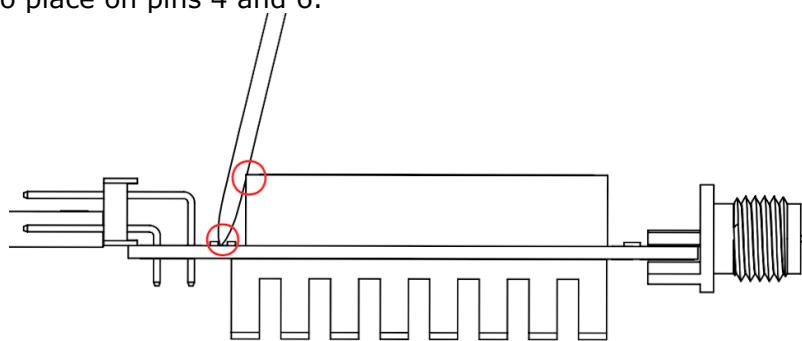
Pin making contact with pad 9 and RF shield to force bootloader mode
